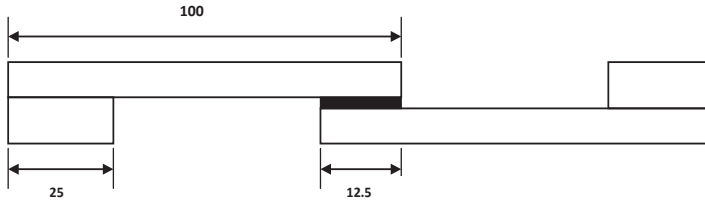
Geometrical dimension of the single lap joint (unit: mm)
